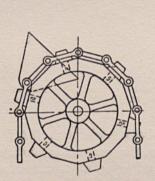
SIDE SPROCKET FOR DOUBLE CHAIN.
